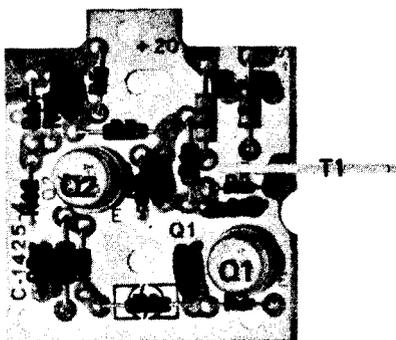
A. A3A1A3 Counter Buffer Amplifier Board Assembly (Errata)
